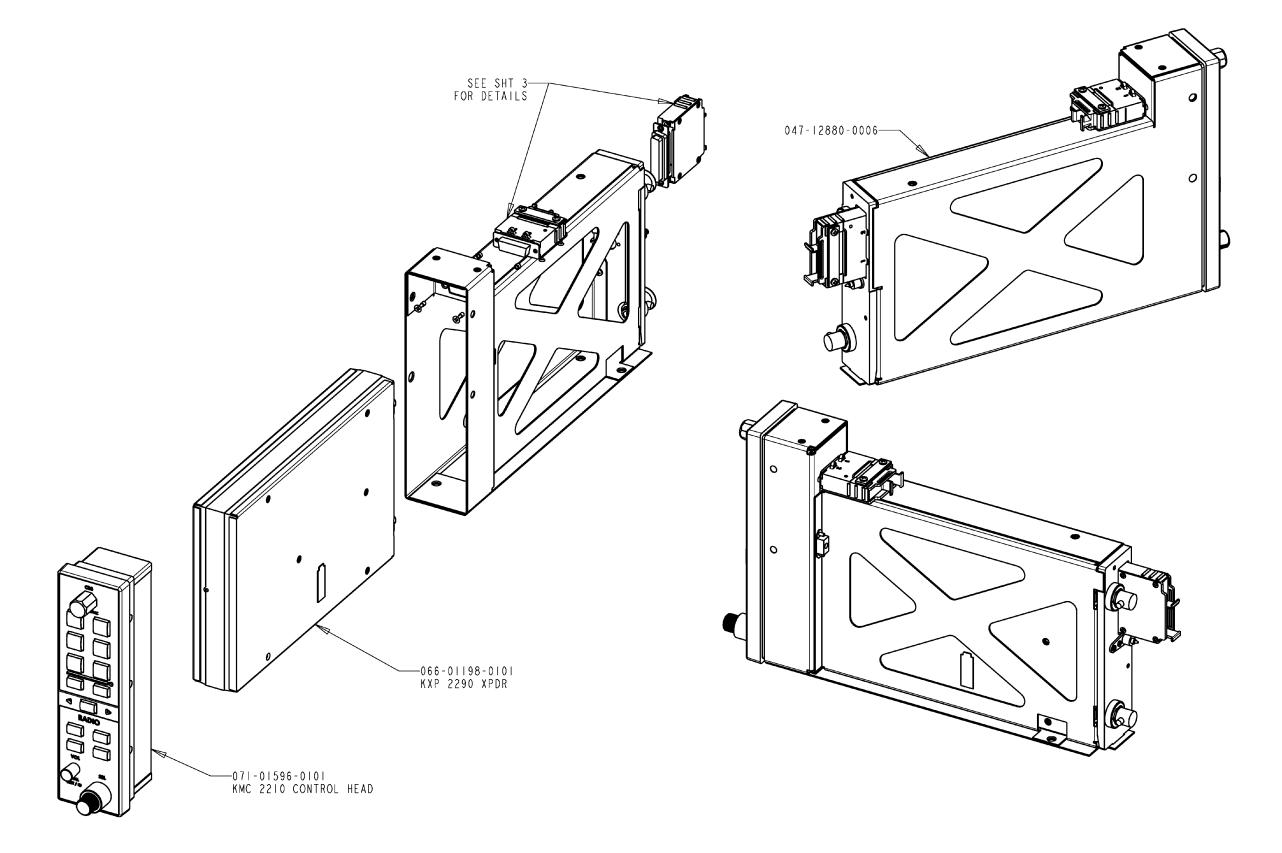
KXP 2290 INSTALLATION DRAWING (Dwg. 155-01786-0000 Rev. B, Sheet 3 of 4)
